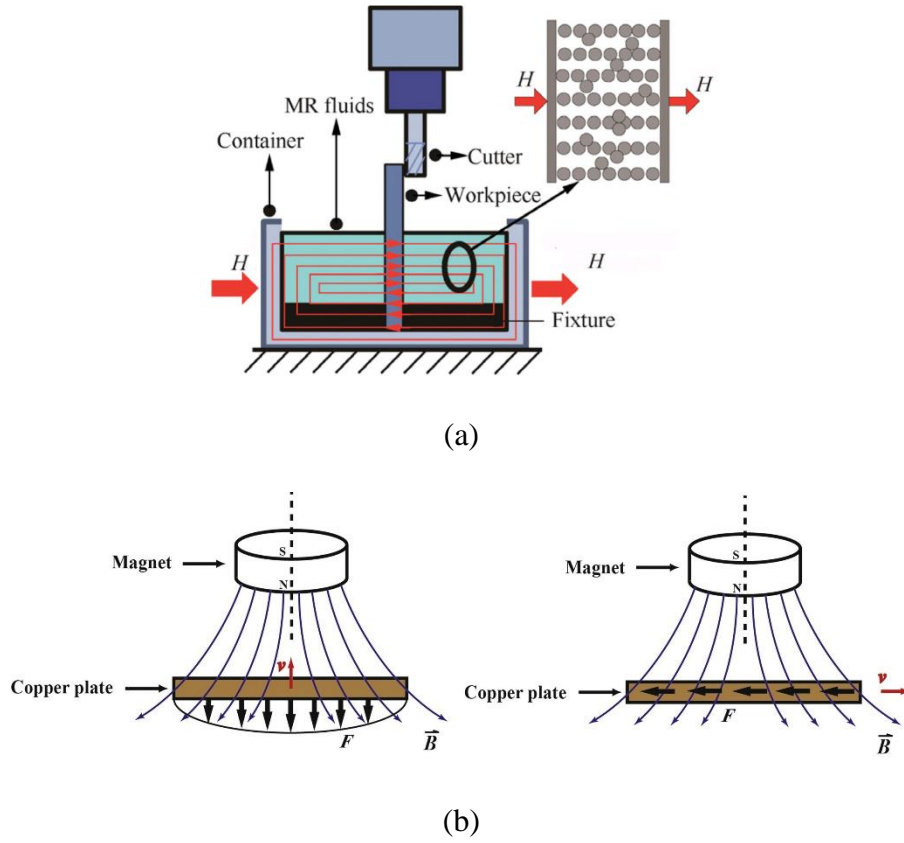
(a) Flexible fixture based on MR fluids [165]; (b) Magnet's flux in workpiece [168].
